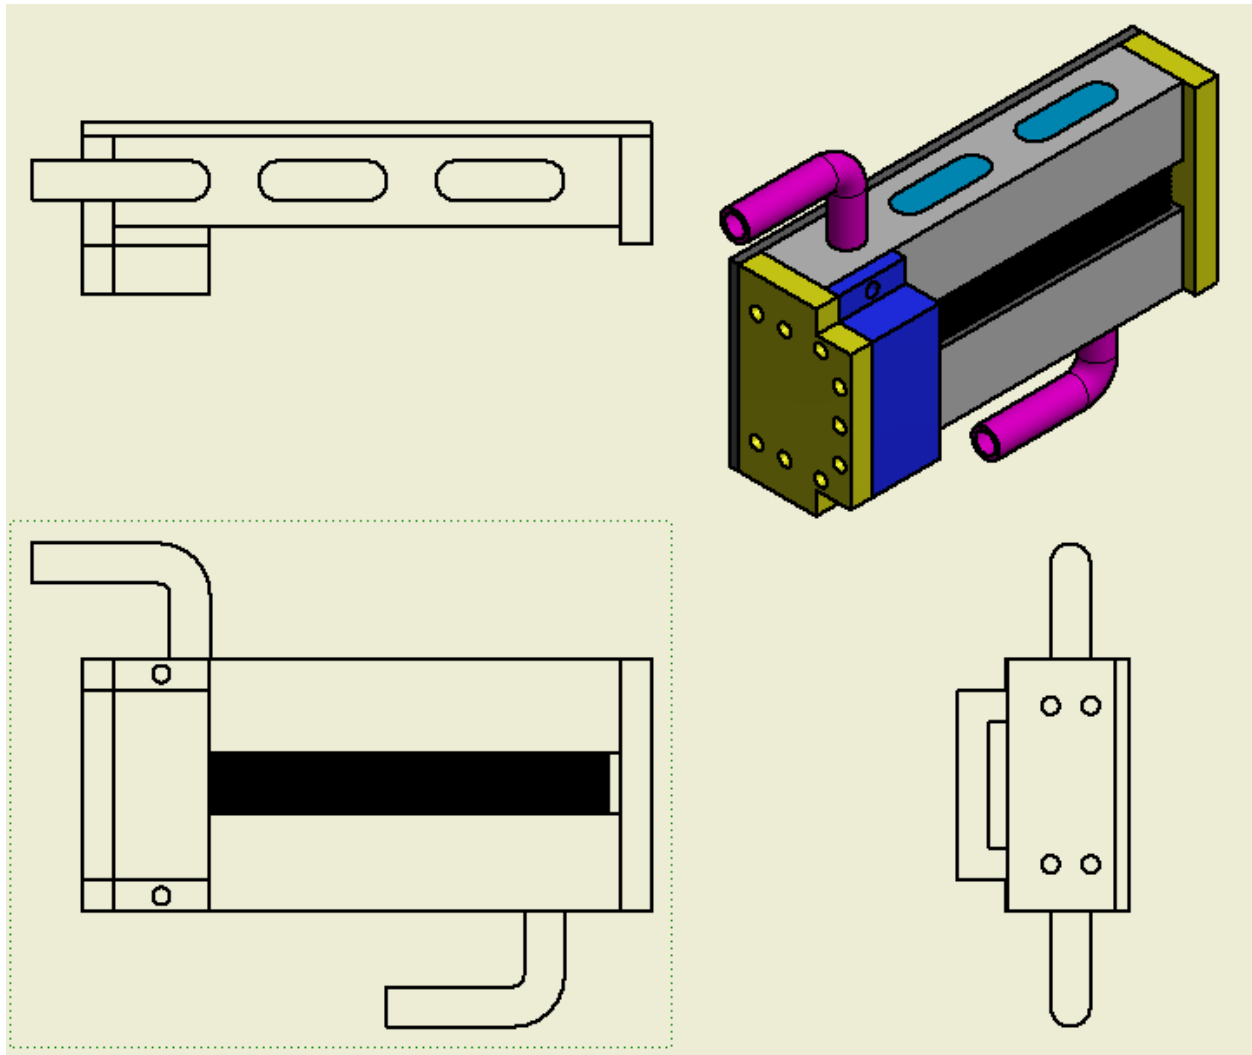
CAD drawing of the assembled second version LiMIT trenches
